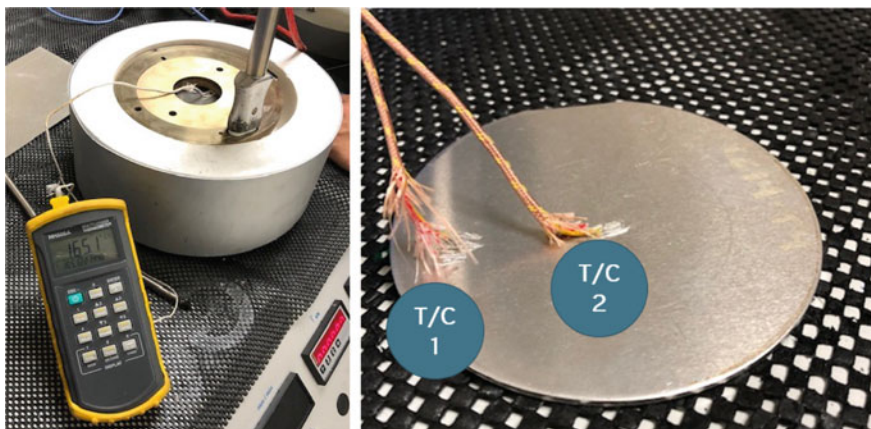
Erichsen tooling furnace and sample with welded thermocouples
